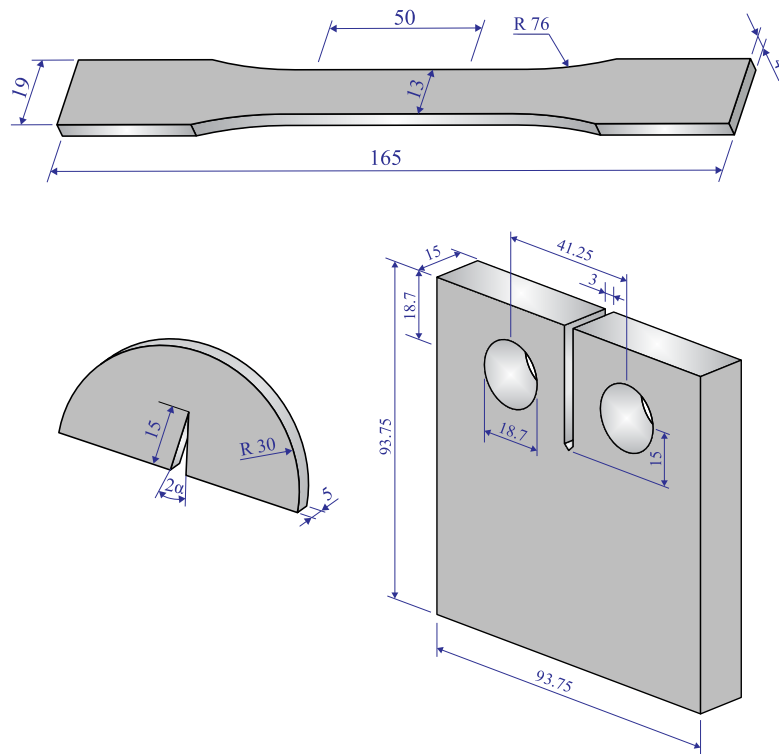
Schematics of designed and fabricated specimens: Dumbbell-shaped, CT, and V-notched semi-circular bending specimens (all dimensions in mm).
